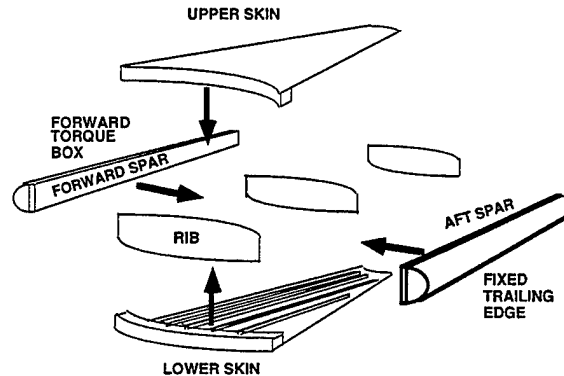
Exploded view of sub-assemblies making up the right horizontal stabilizer.
